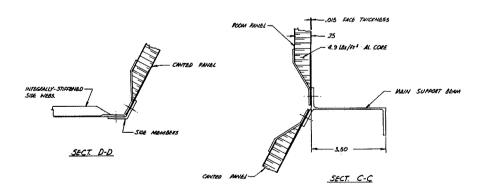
Centrifuge Structural Arrangement - Concept No. 2A
